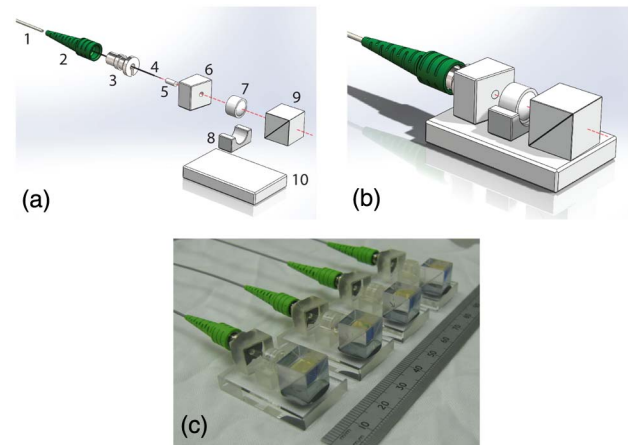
(a) Expanded CAD drawing of the parts of a fiber coupler with the optic axis is shown as a red dashed line, (b) CAD drawing of the assembled fiber coupler with the optic axis shown as a red dashed line, and (c) photograph of four hydroxide catalysis bonded fiber couplers.
